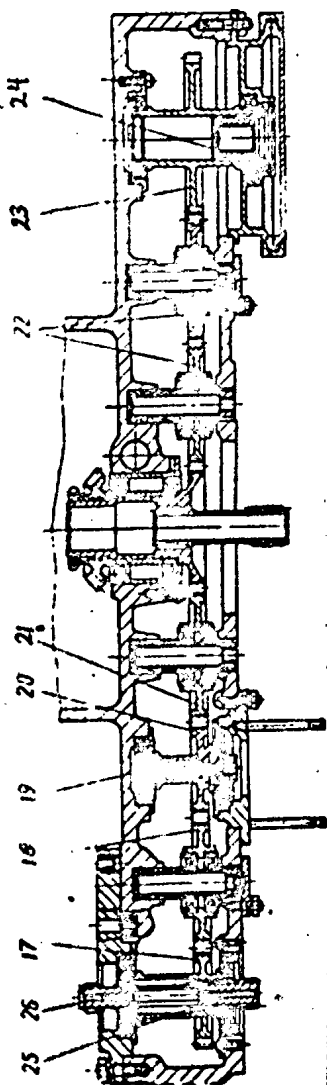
Drives, located in the lower portion of the front housing (Section A-B-V-G-D-Z-I-K-L, see Fig. 35)
